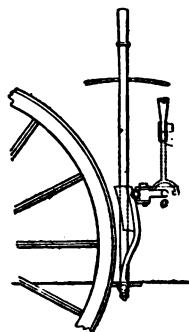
Petter, Hill, & Boll's Starting Gear and Brake.
